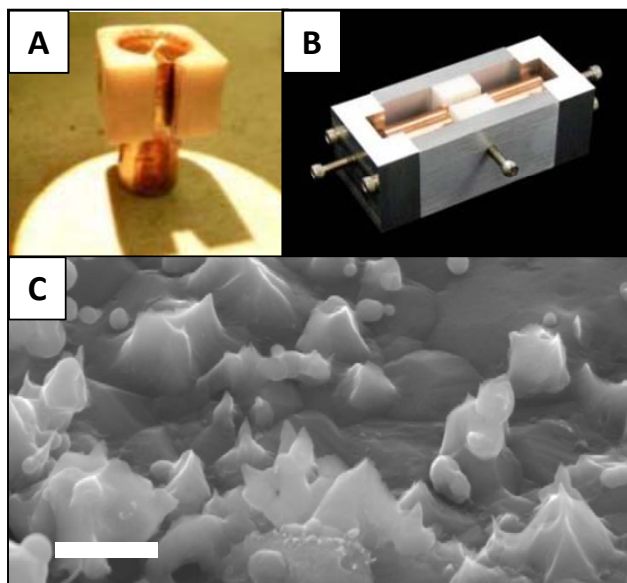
A) A single copper bar used for tensile testing is nested within a teflon collar. B) A tensile specimen loaded in a fixture ready for fusion. C) SEM image of a fracture surface after tensile testing. The scale bar represents 500 nm.
